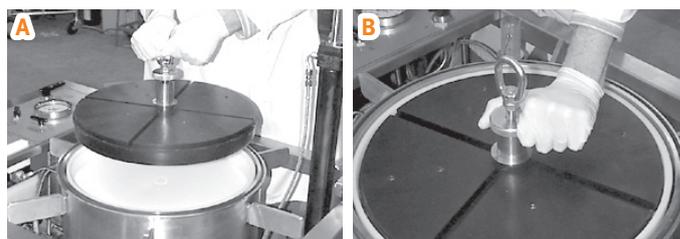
Placing the cartridge tool onto the top of the cartridge using both hands. B: Turning the knurled knob clockwise until the four plates are fully spread (the knob will not turn any more).
